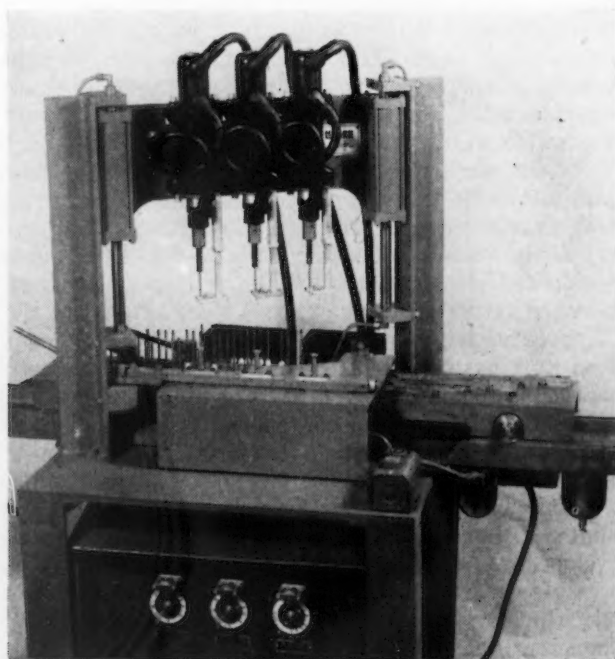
A three-gun production stud welder with special jig for welding long studs on a telephone switchboard terminal rack.
